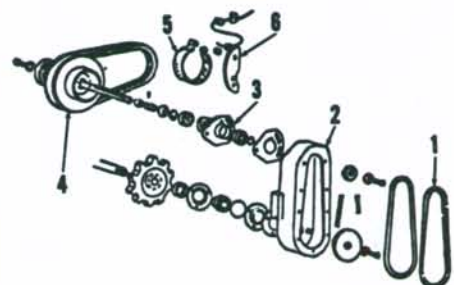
Exploded view of chain case and associated parts used in 1969.
